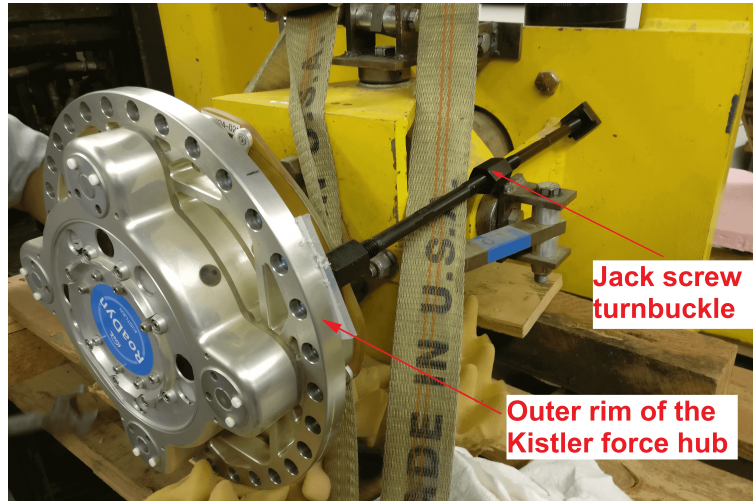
Use of jack screw turnbuckle to remove the force hub
